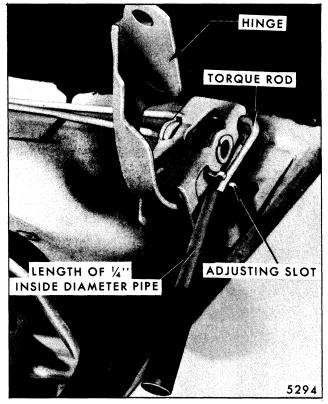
Rear Compartment Torque Rod Adjustment - "F" Styles
